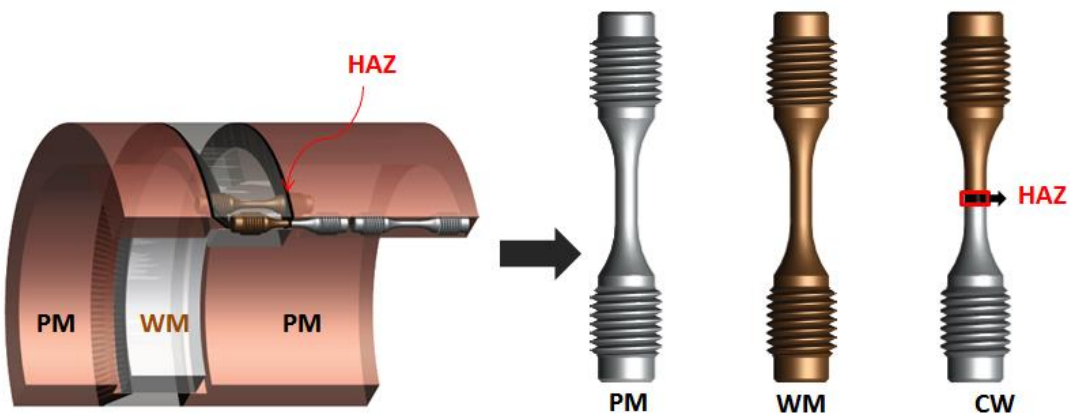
Positions of different HTLCF test specimens, showing PM, WM and CW (inclusive of HAZ) specimens.
